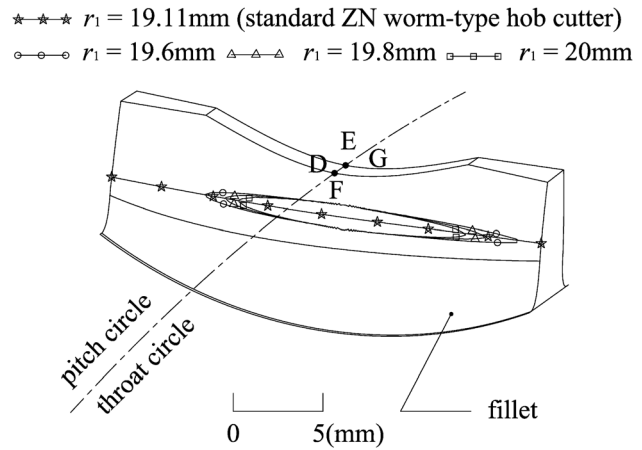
Contact ellipses on tooth flank of the full RA worm gear generated by different pitch radii of oversize ZN worm-type hob cutters
